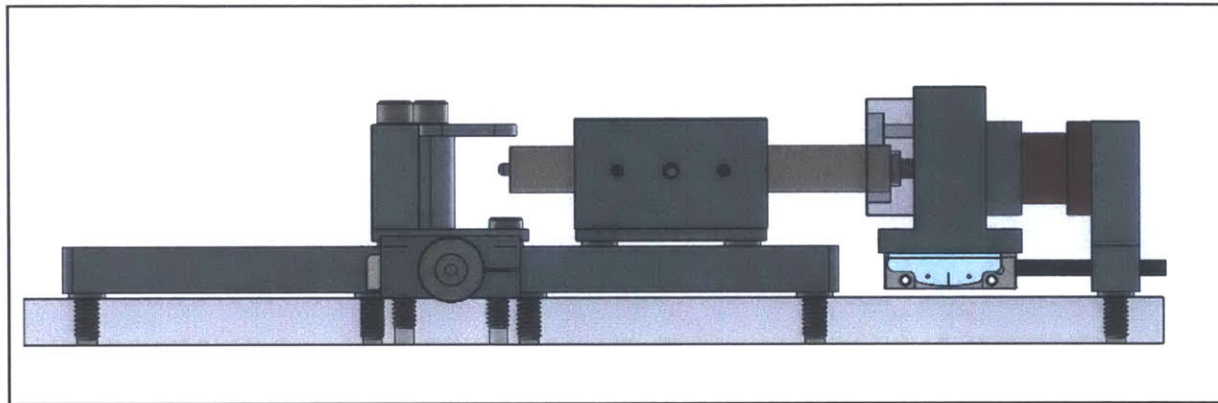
Side view, Renshaw linear encoder for x axis positioned on bottom surface of voice coil shaft mounting block.
